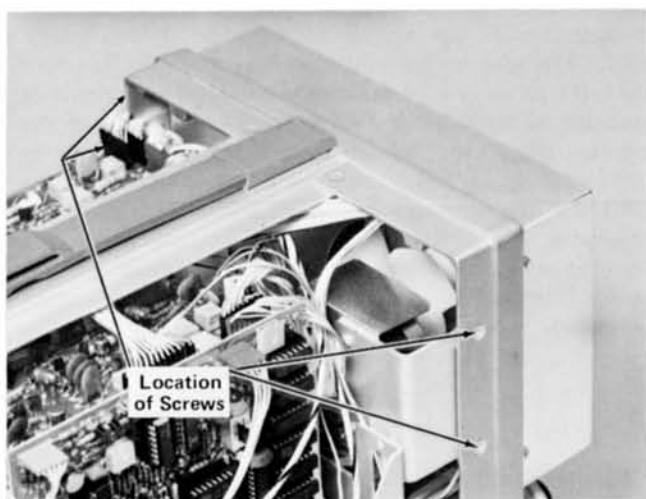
Location of screws holding Low Voltage sub-chassis.
